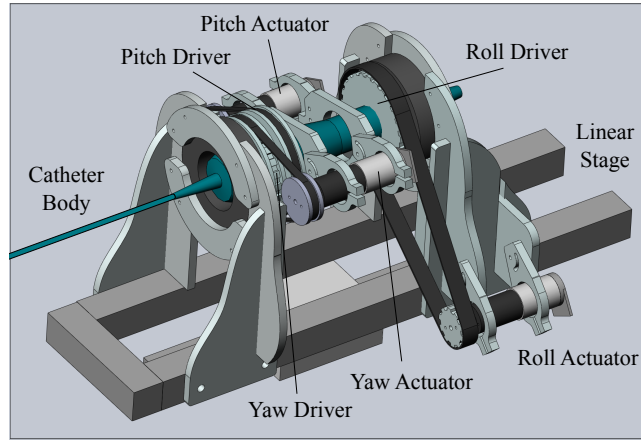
CAD model of US catheter steering robot with 4-DOF.
